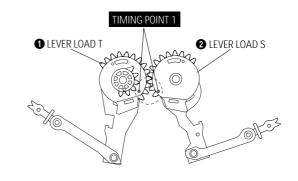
Gear Loading Drive, Slider Cam, Lever T, S Load Ass'y Removal
